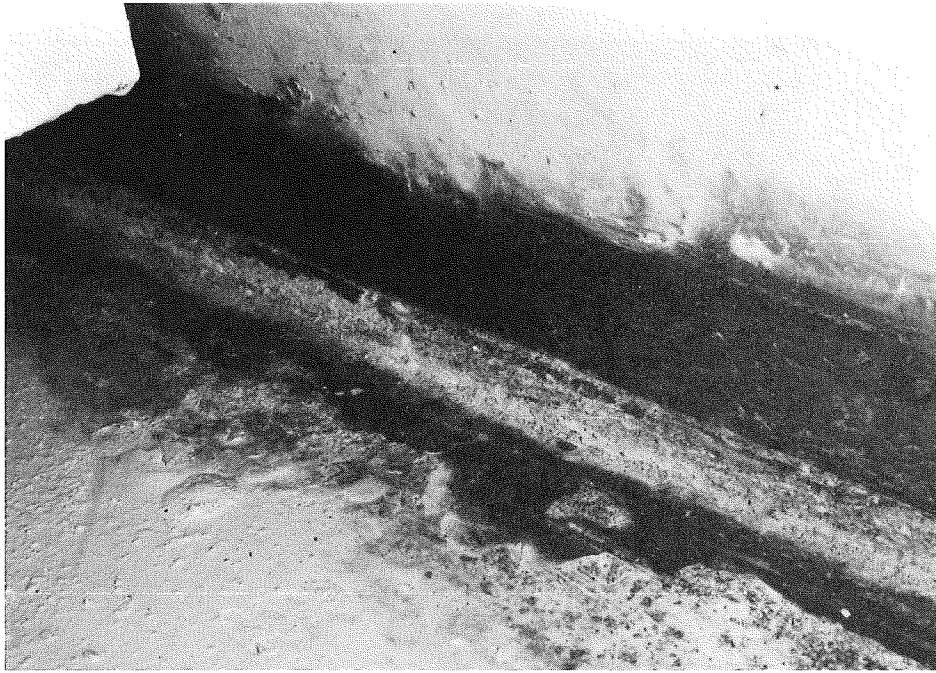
Weld in Box Corner after Removal of Backing Bar
